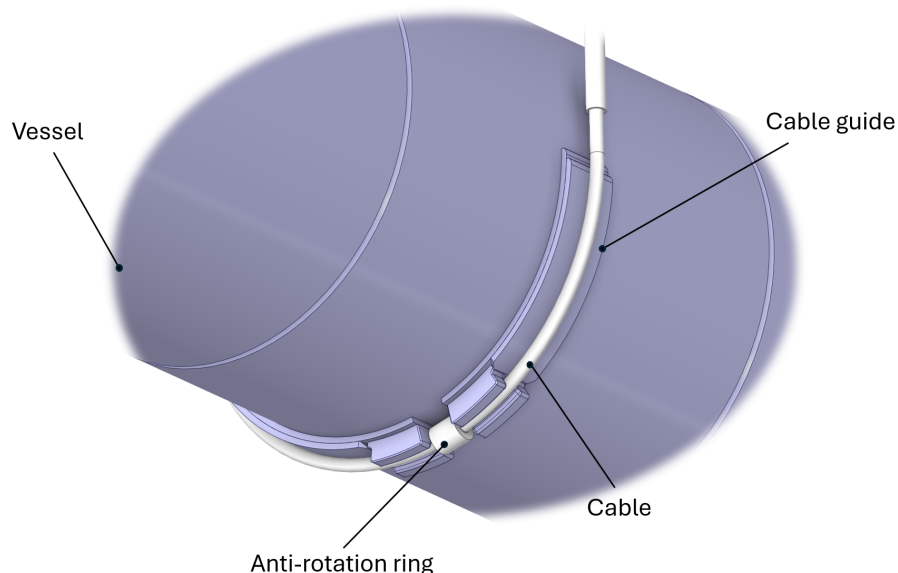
Detail view of the bottom surface of the dump block. Each cable is fed through cable guides that are welded to the vessel. An anti rotation ring prevents the ability of rotation of the vessel.
